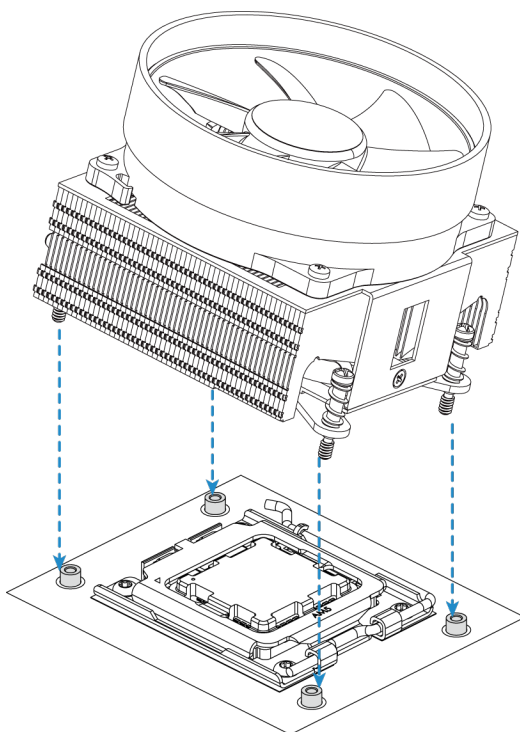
Mounting the Heatsink onto the Socket Frame
